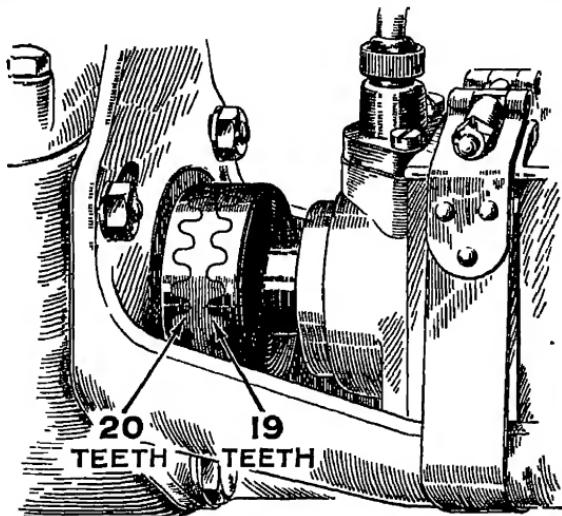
MAGNETO DRIVE VERNIER COUPLING
